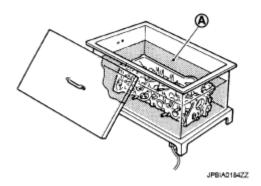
Soaking Cylinder Head Into Heated Oil Courtesy of NISSAN MOTOR CO., U.S.A.
